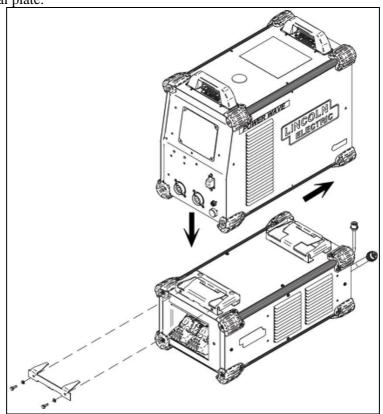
(s) Connection of ROBOWELD iC/H3 (Power Wave R350) and STT module (1/3)
